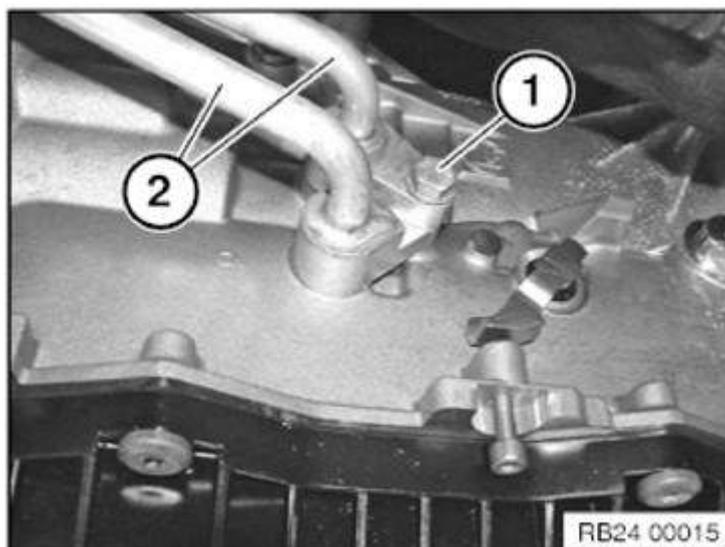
Identifying Transmission Oil Cooler Hydraulic Lines And Screw
